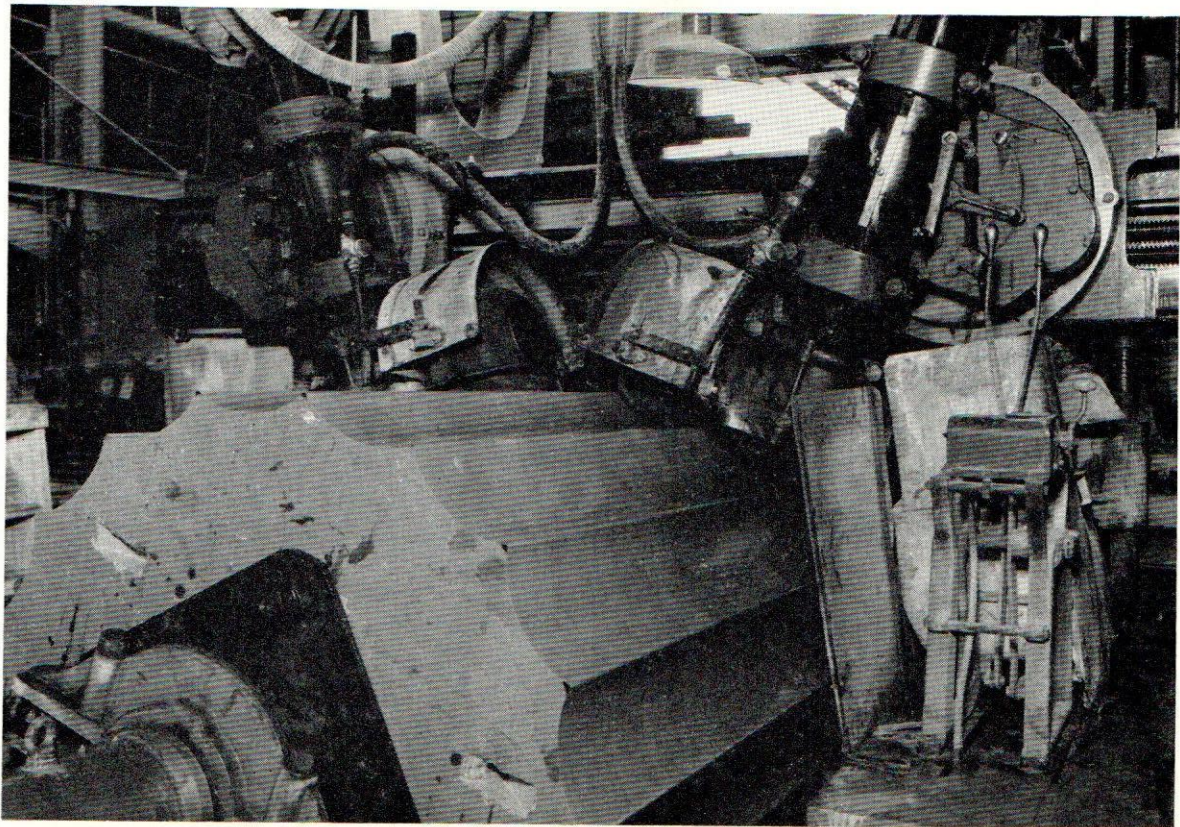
Machine used to form special shapes of marble. (Photo courtesy Ty-Sa-Man Machine Co., Knoxville)
